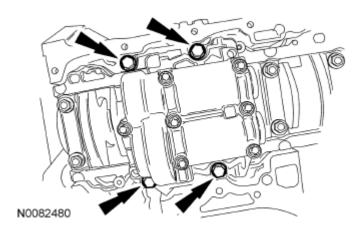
Locating Balancer Unit Bolts Courtesy of FORD MOTOR CO.
